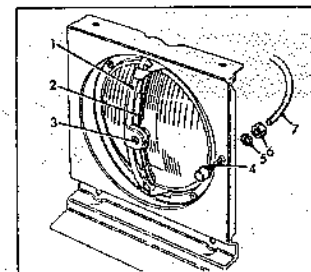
Headlamp wiper/washer jet assembly (Sec 38)
